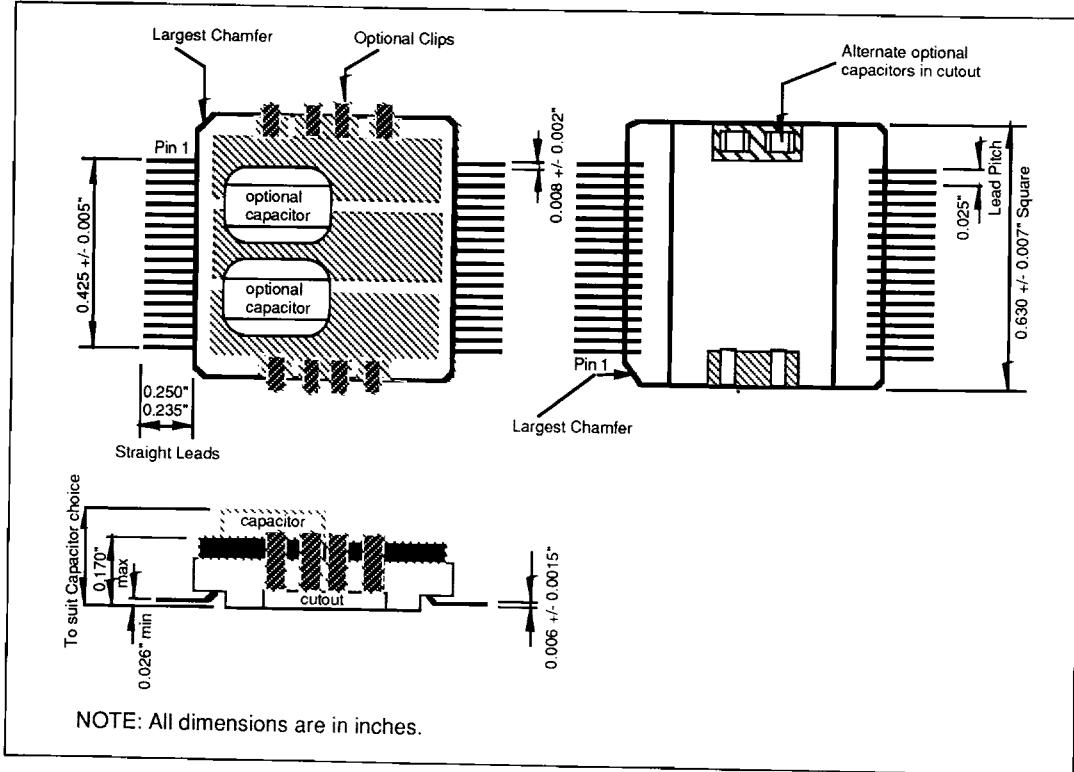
36 Lead Ceramic Flatpack (Solder Seal) - Package Style F
